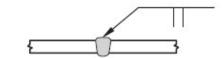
Square groove weld specimen in butt joints
